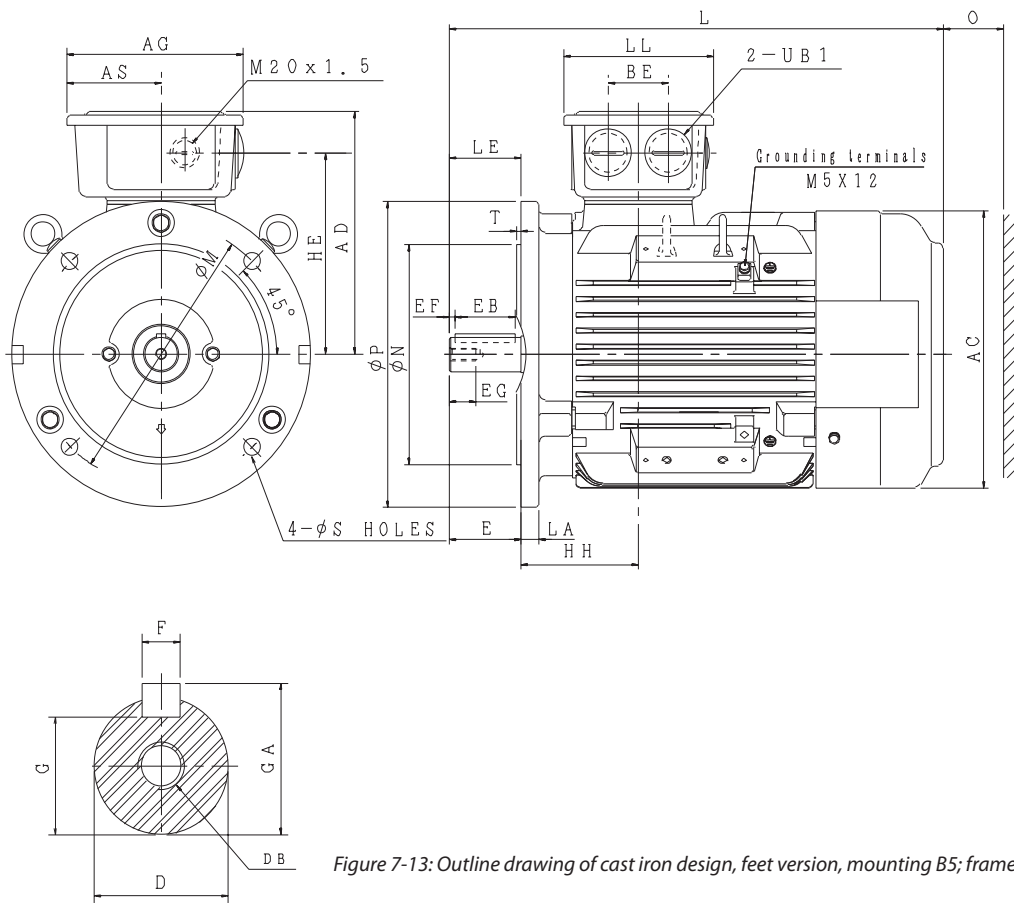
Outline drawing of cast iron design, feet version, mounting B5; frame size 132M - 100L
